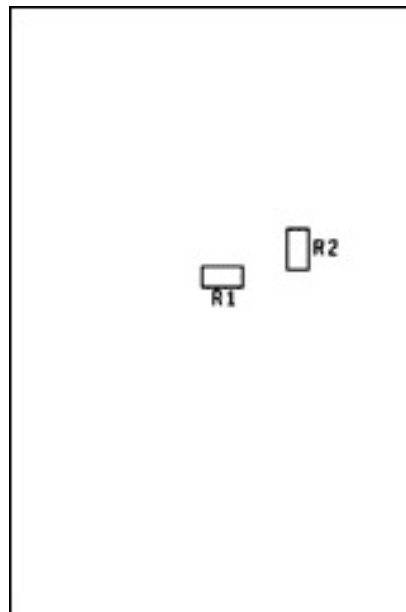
DS3151 Single-Port, T3/E3 LIU Layout—Silkscreen Bottom Layer (view mirrored)
